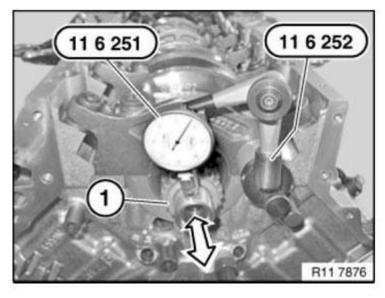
Checking Crankshaft Axial Play Courtesy of BMW OF NORTH AMERICA, INC.
